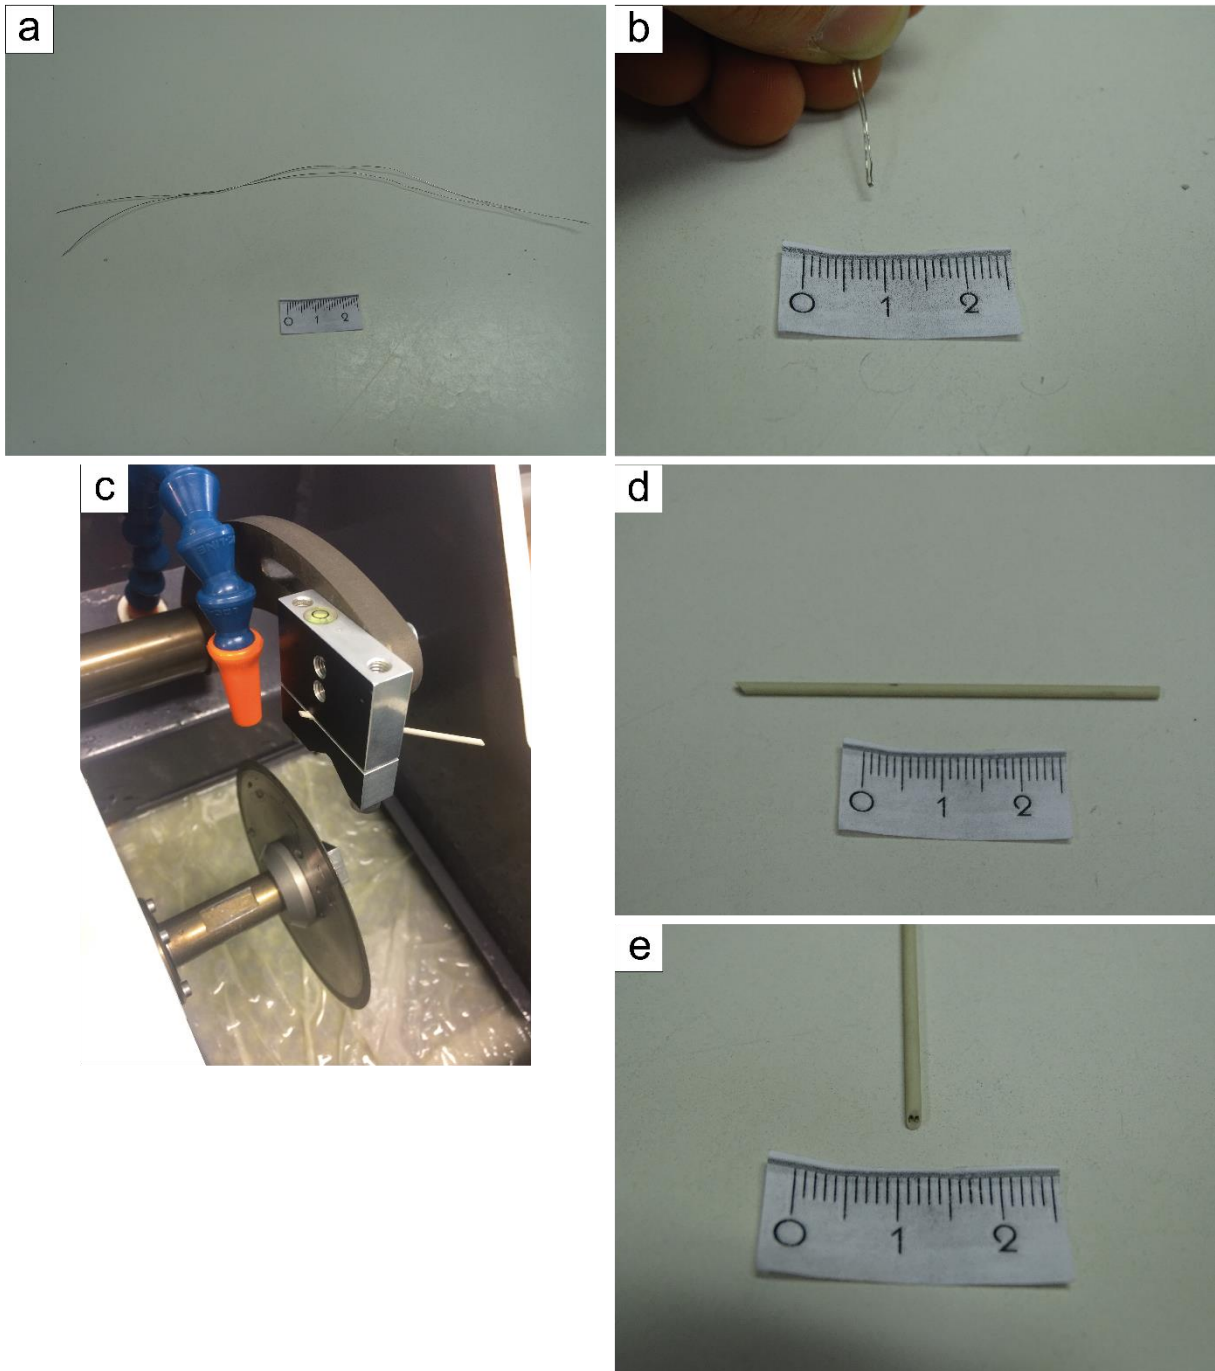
(a) For S-type thermocouples, two wires are cut: one made of Pt and the other of Pt-Rh. (b) The two wires are then welded together at one tip. The weld is then flattened and cut to a square shape. (c) The mullite tubes sheaths are cut at the right length with one end cut at 45° using the diamond saw and a special holder. (d) The longer mullite tube with one end at 45° and the other flat. (e) The mullite tubes contain two holes where the wires will be inserted. The holes need to be parallel to the 45° end.
